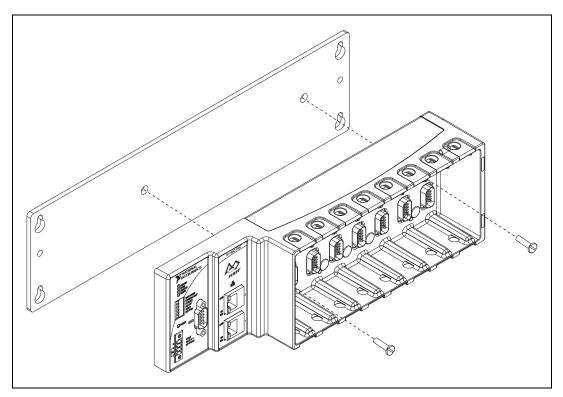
Installing the Panel Mount Accessory on the cRIO-FRC
